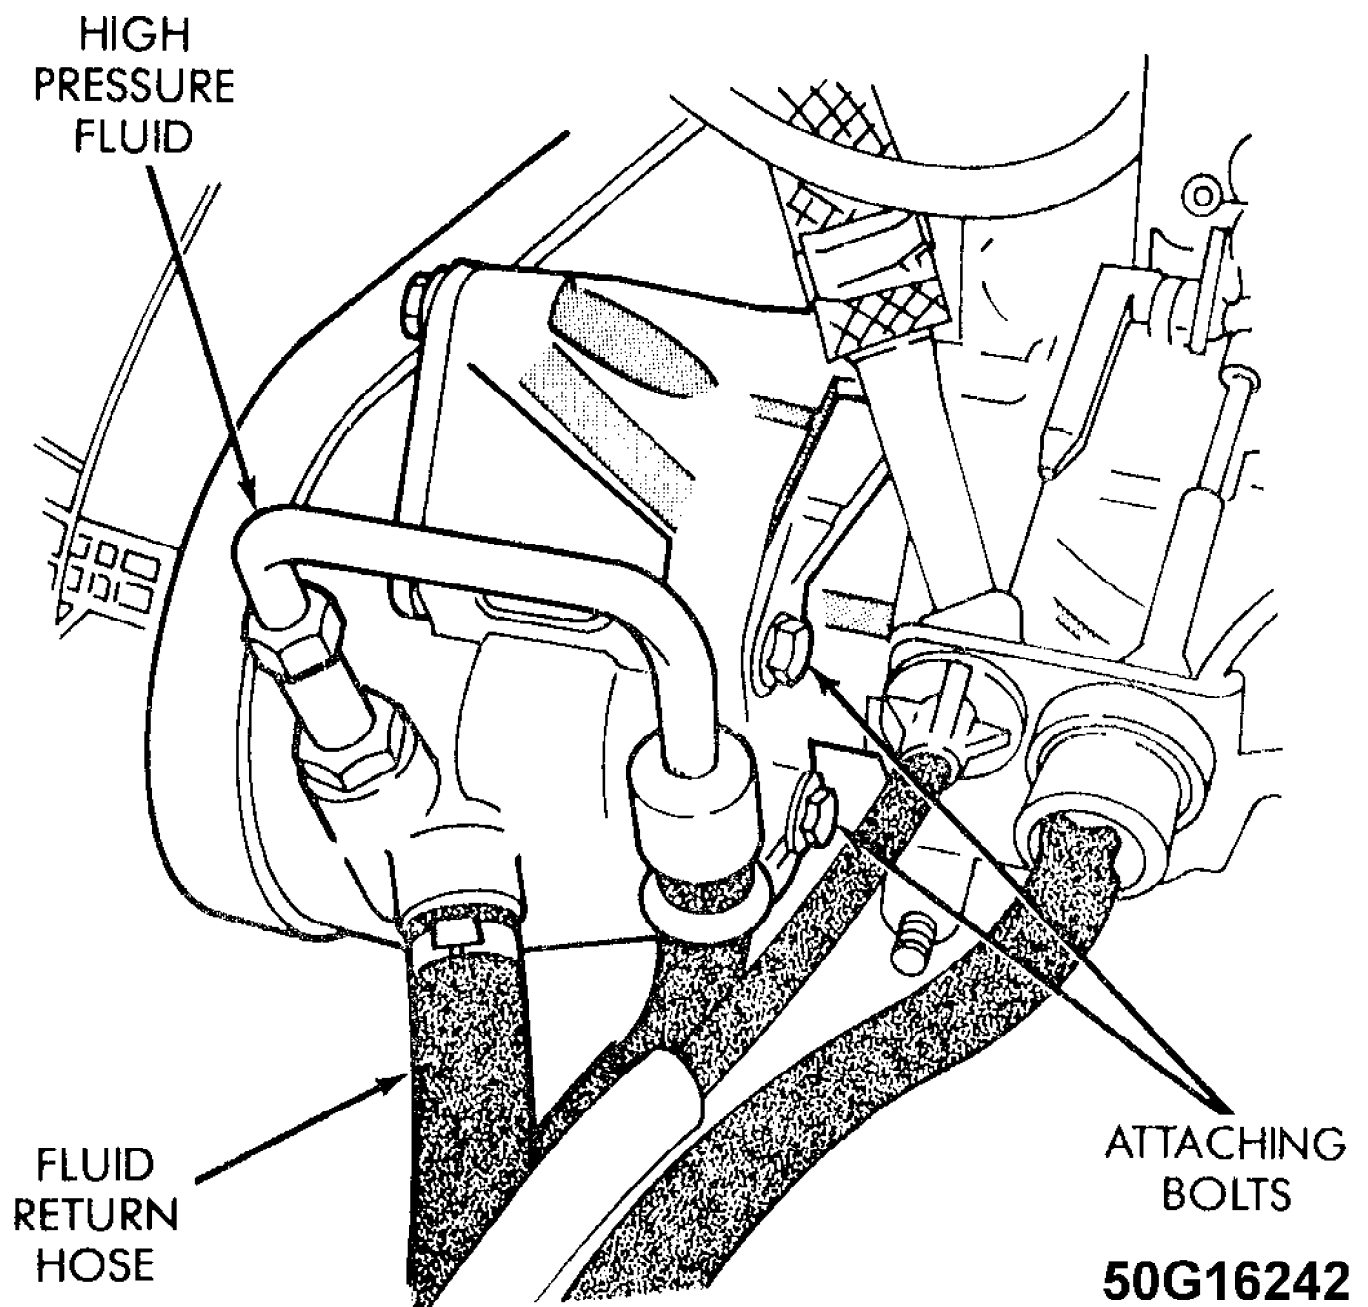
Power Steering Pump (Cherokee & Comanche)
